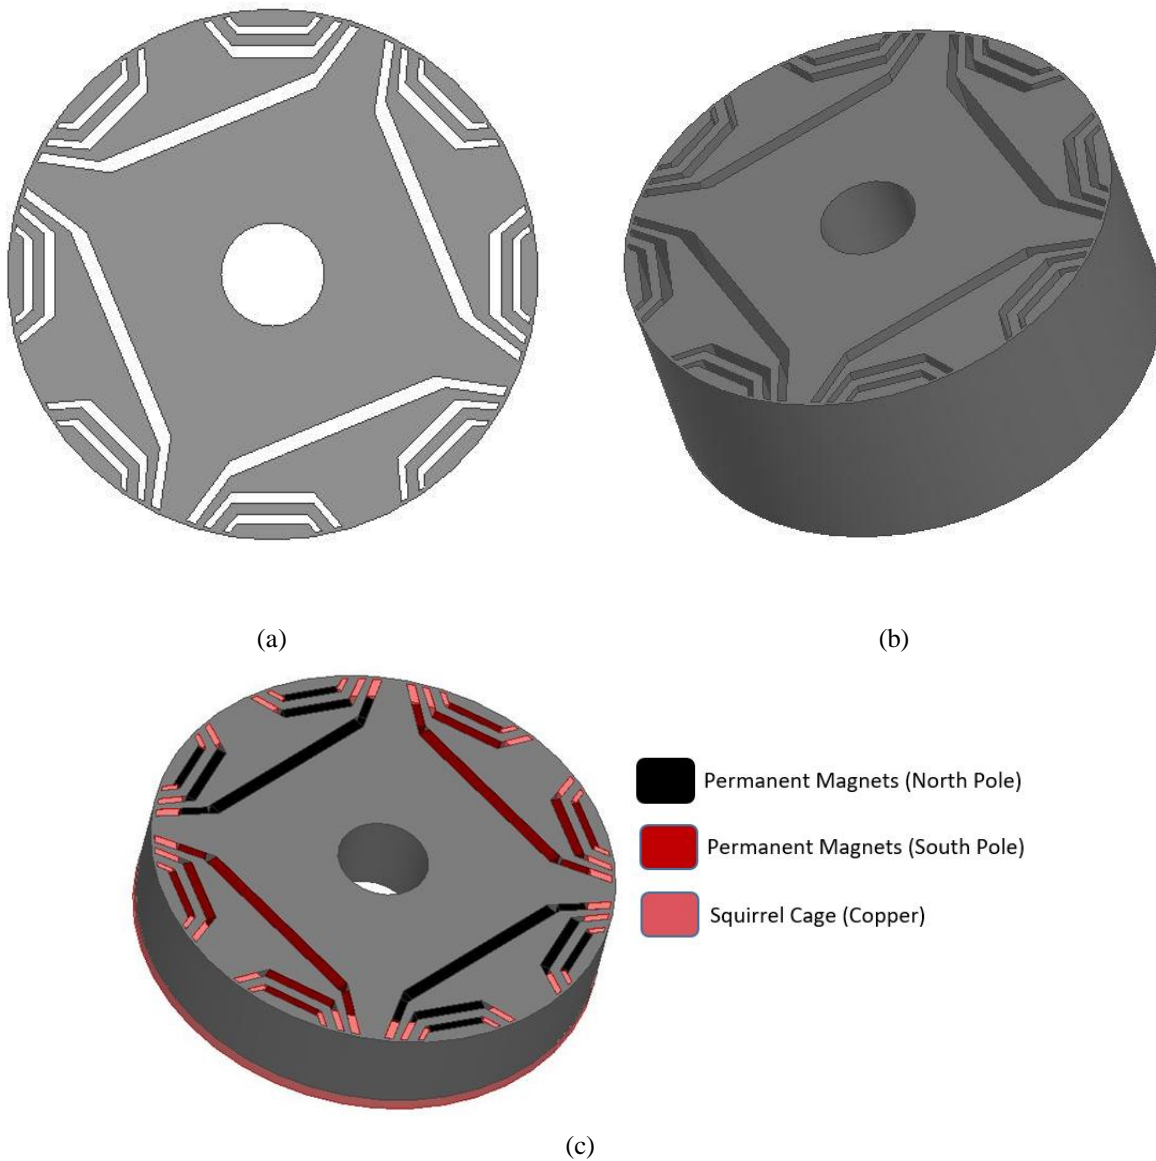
Rotor Design (a) Top View (b) Isometric View (c) Half section view with permanent magnets and squirrel cage
